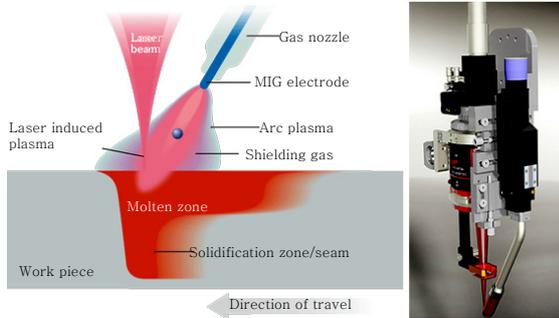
Schematics and head-set of laser hybrid welding
